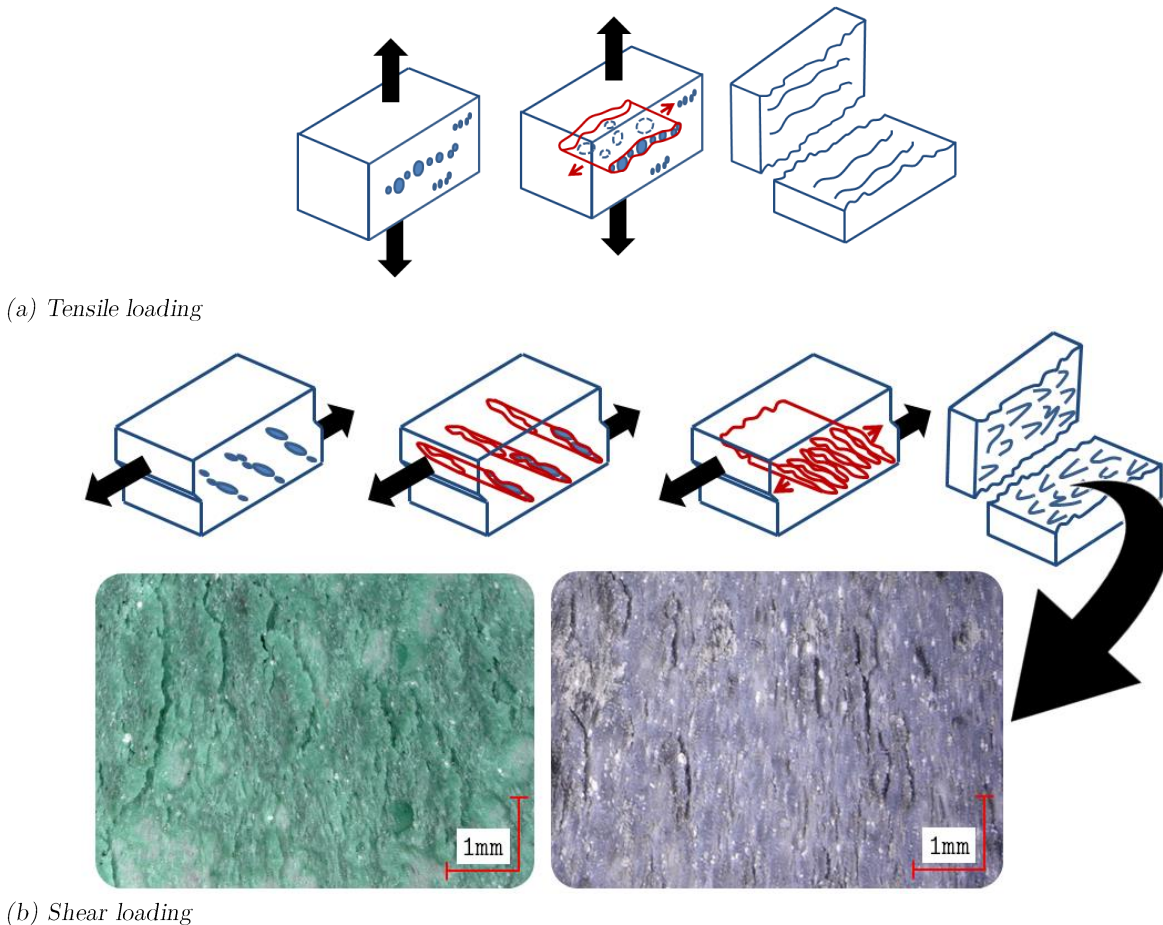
Schema of the evolution of the fracture depending on the type of load in tensile tests (a) and in shear tests (b). Keyence digital microscopic images of the fracture surface in shear tests. Inspired from (ASM International, Metals Park, 1994).
